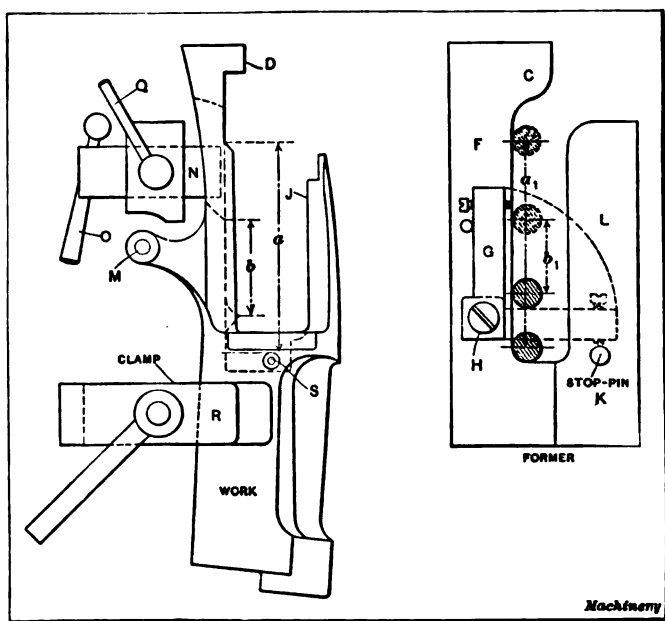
Plan View of Fixture and Former used for Profiling Operation on Rifle Receiver
